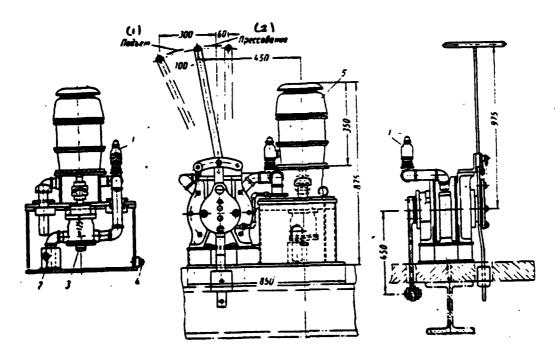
Installation with the rotational hydraulic motor for rotating the shaft of the distributor: 1 - safety valve; 2 - filter; 3 - rotary pump with the supply 165 l/min to the pressure 6 kg/cm²; 4 - plug for the drain; 5 - electric motor with a power of 2 hp with 1140 r/min.
